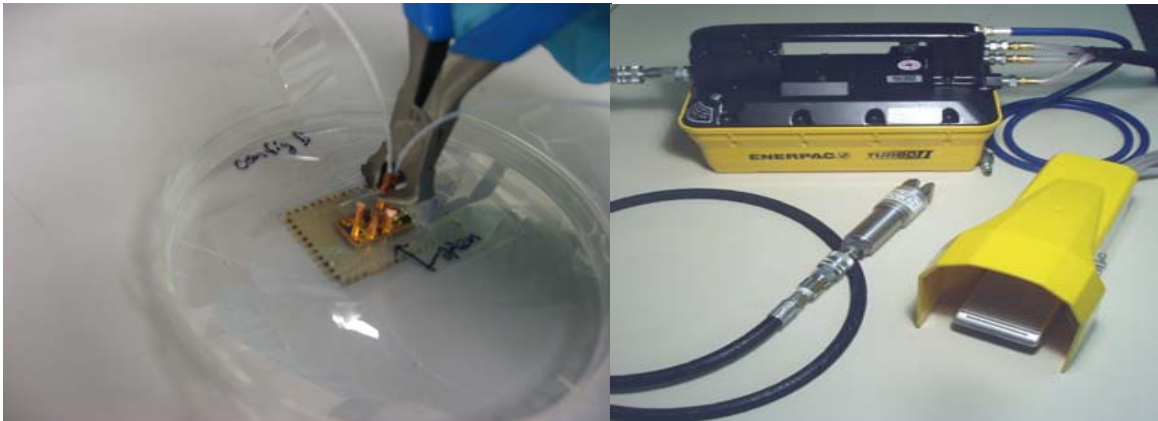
(1) Hand crimping tool being used to pinch off tubes. (2) Hydraulic pinch off tool.
